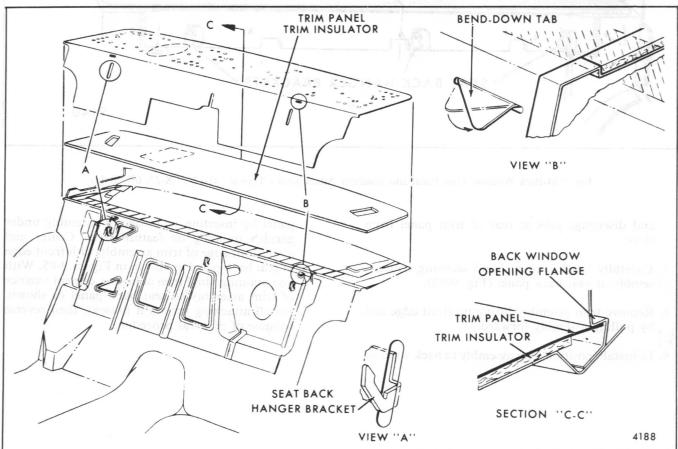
Rear Seat-to-Back Window Trim Panel and Insulator - Typical "H-11" Styles
